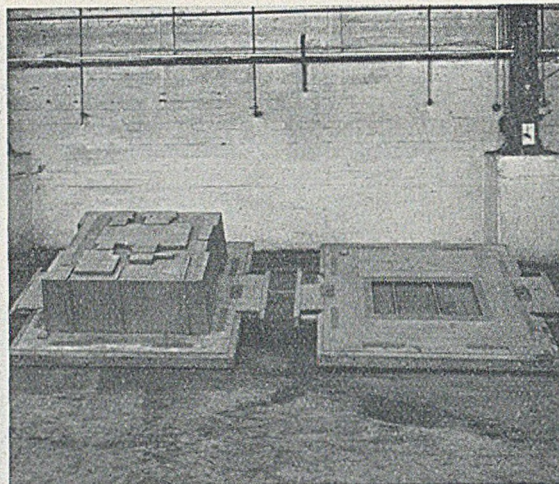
Pattern Equipment for Producing the Casting shown in Fig. 13 by Core-assembly Methods.
